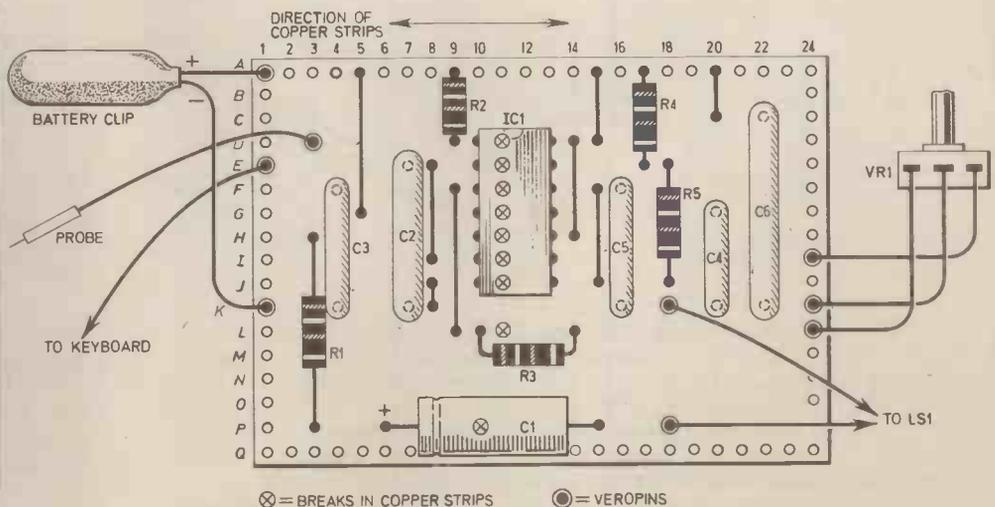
Stripboard layout also showing the breaks required on the underside. This method of construction is preferred if the constructor is unsure about making a PCB.
